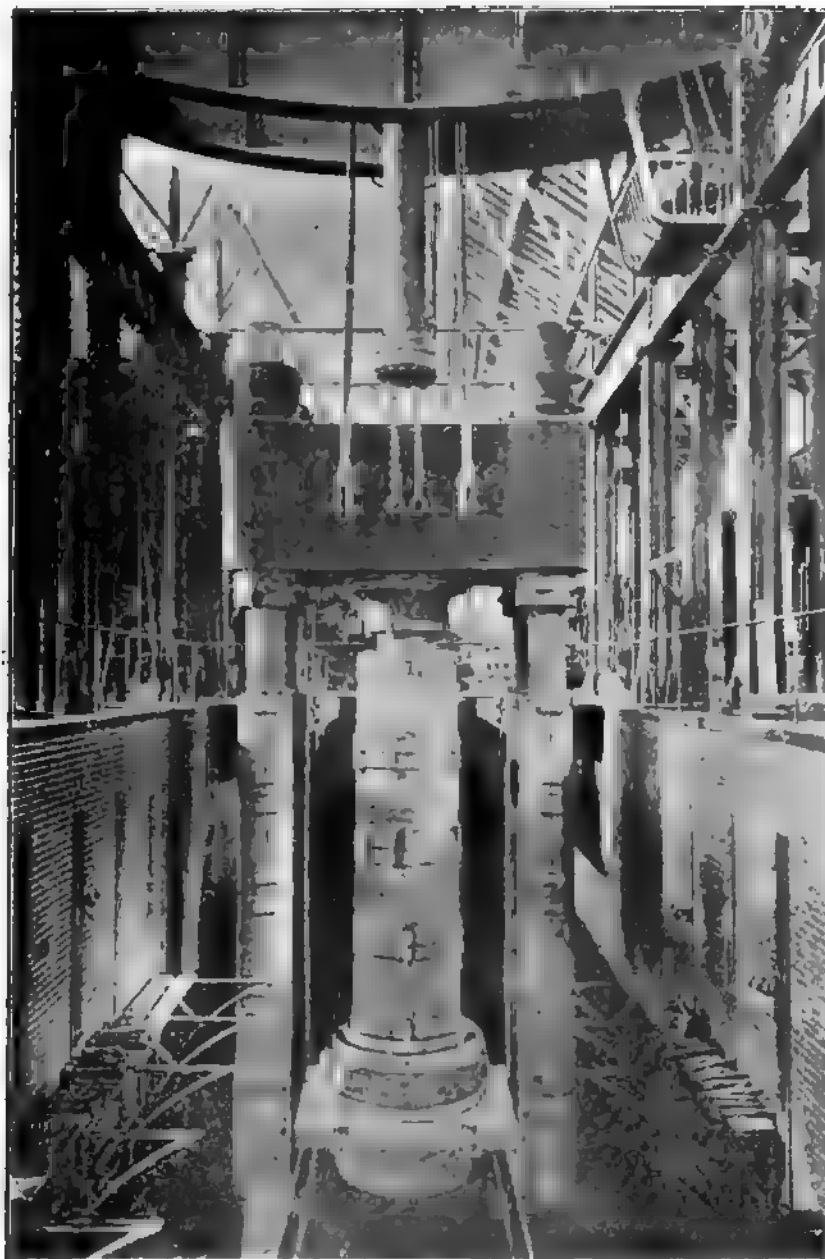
LARGE FORGING PRESS AT THE BETHLEHEM WORKS.
